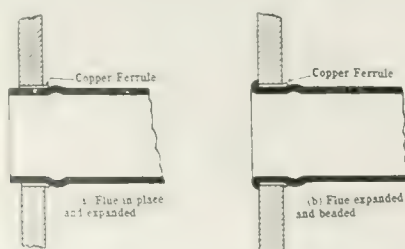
THE METHOD OF EXPANDING AND BEADING OVER BOILER FLUES IN END SHEETS WITHOUT WELDING
